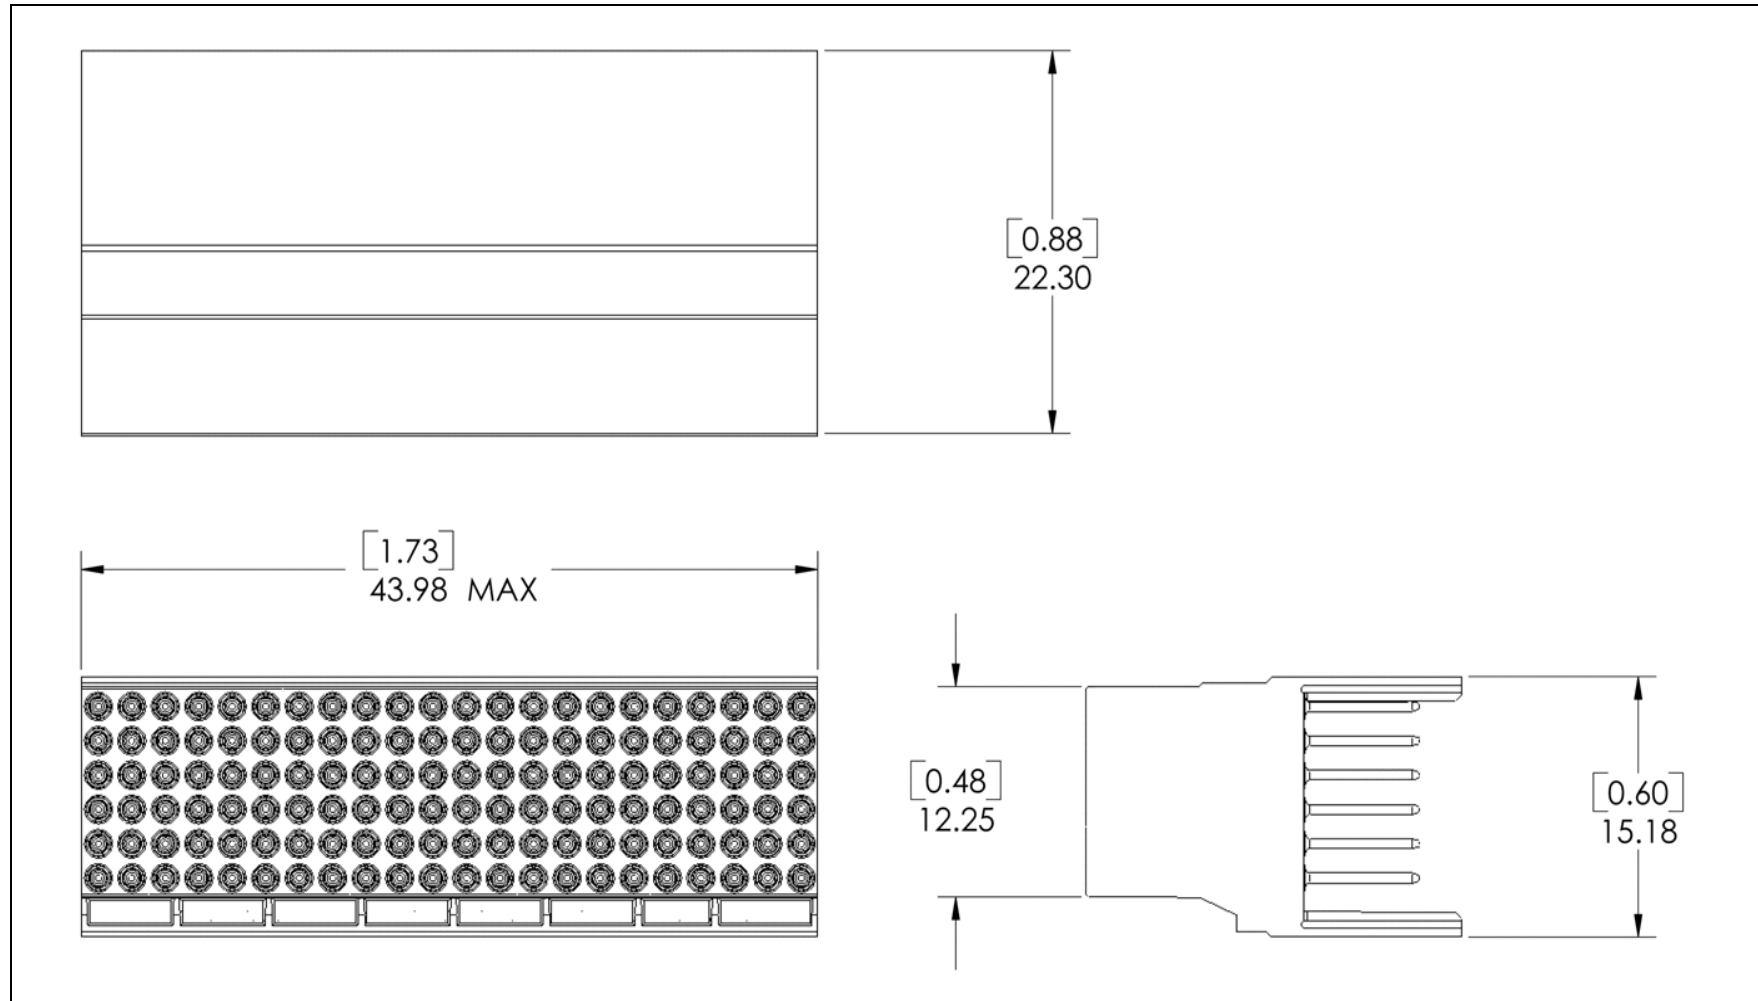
Adapter Connector, 311P822-FA-110-A
